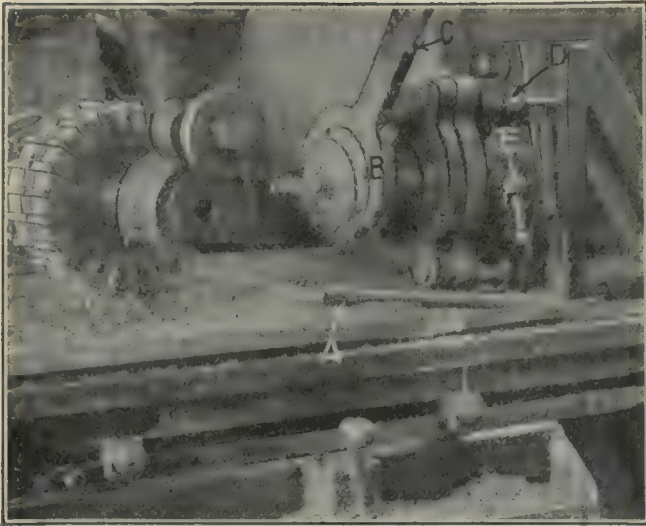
MILLING SQUARES ON ENDS OF SHAFTS
